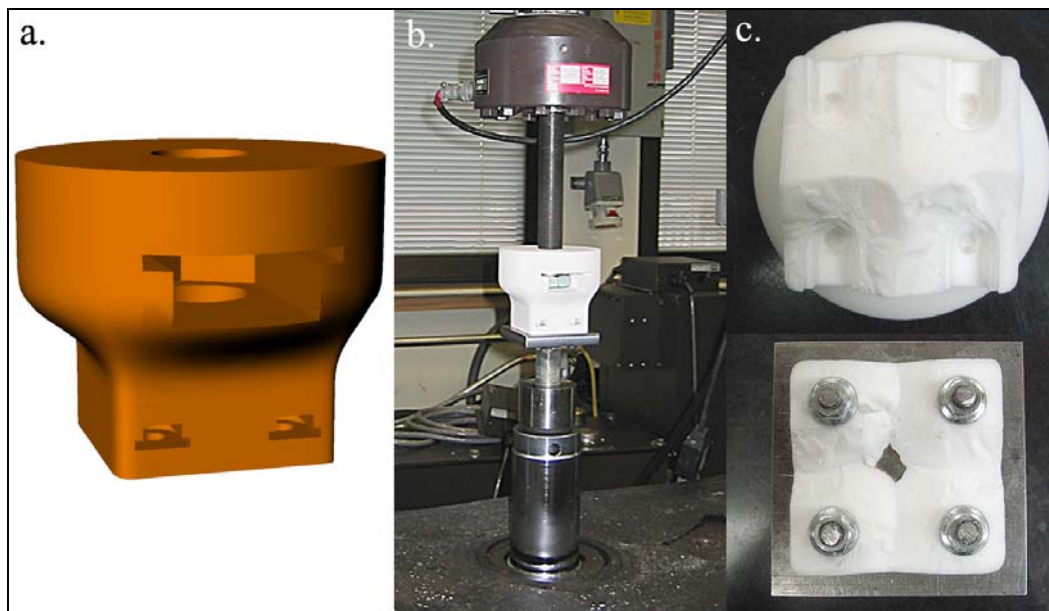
(a) Complete Attachment Fitting Specimen; (b) Test Setup; (c) Specimen Condition after Testing.
